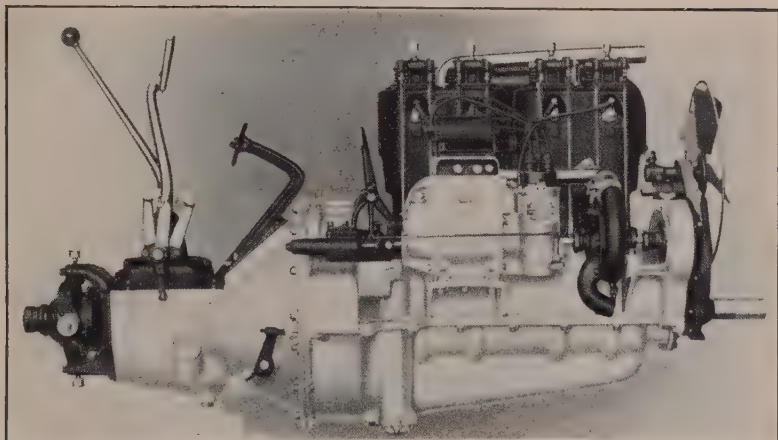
Buick. I-head cylinder with overhead valves, showing valve lifting rods on outside.
